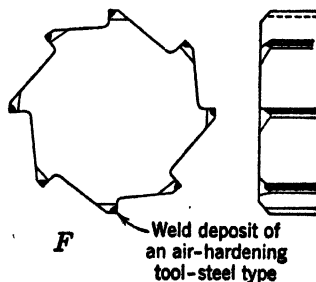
F. Method of Making Inexpensive Milling Cutter from Carbon-Steel and Hard-Surfacing Alloy.
